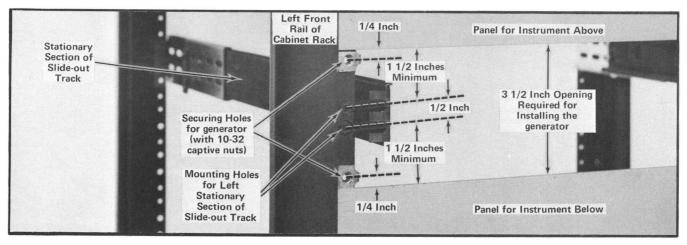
Vertical mounting position of the left stationary section and location of the securing holes. These same dimensions apply to the right front rail.
